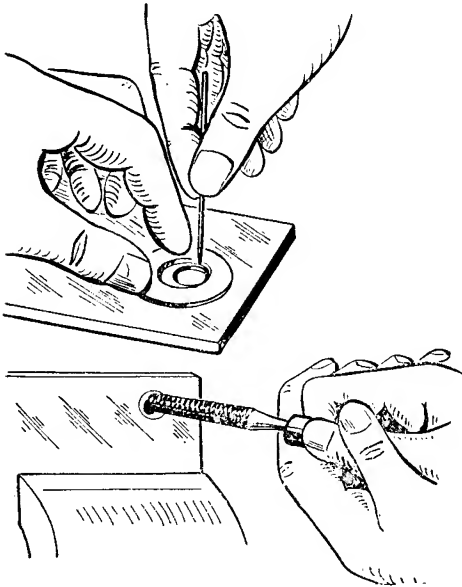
Holes which are out of position can be filed out, using a washer and scriber for marking
